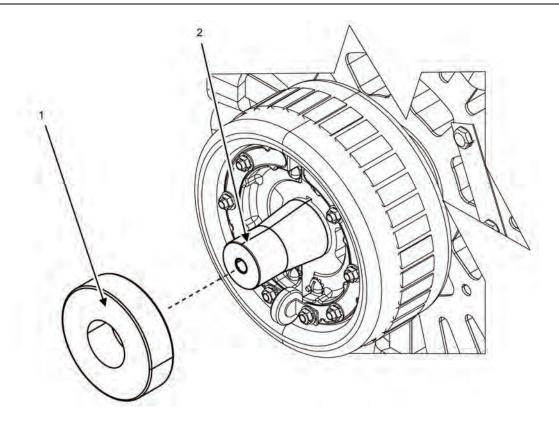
400 Hz Generator Bearing Removal — Detail.
